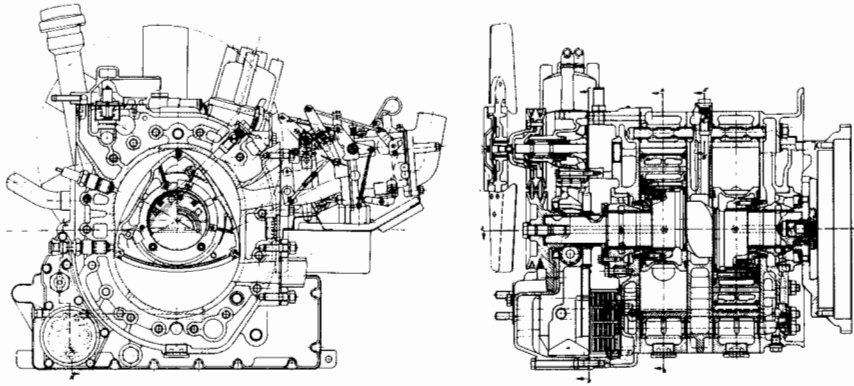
14 Sectional drawing of NSU model KKM 612 2-rotor engine
